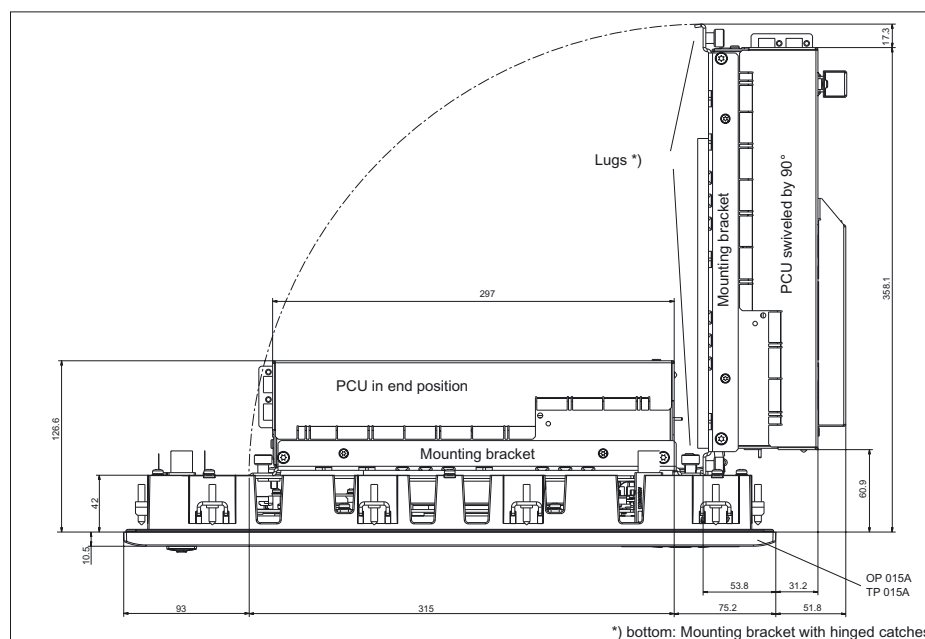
Attaching the PCU to the OP 015A operator panel front (viewed from above)
